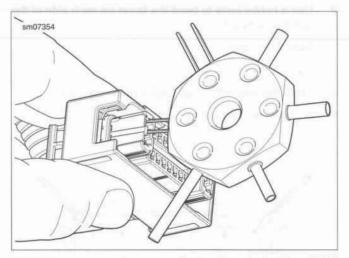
Removing Large Socket Terminals: Tyco MCP
